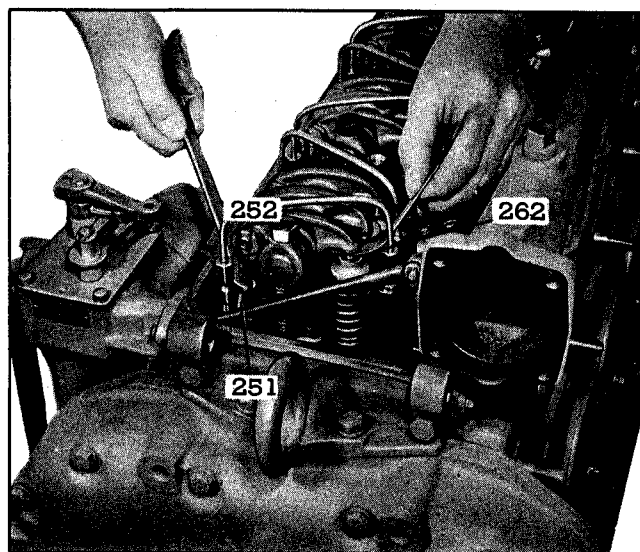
Adjusting Valve Clearance—Feeler Gauge KMO 233.
